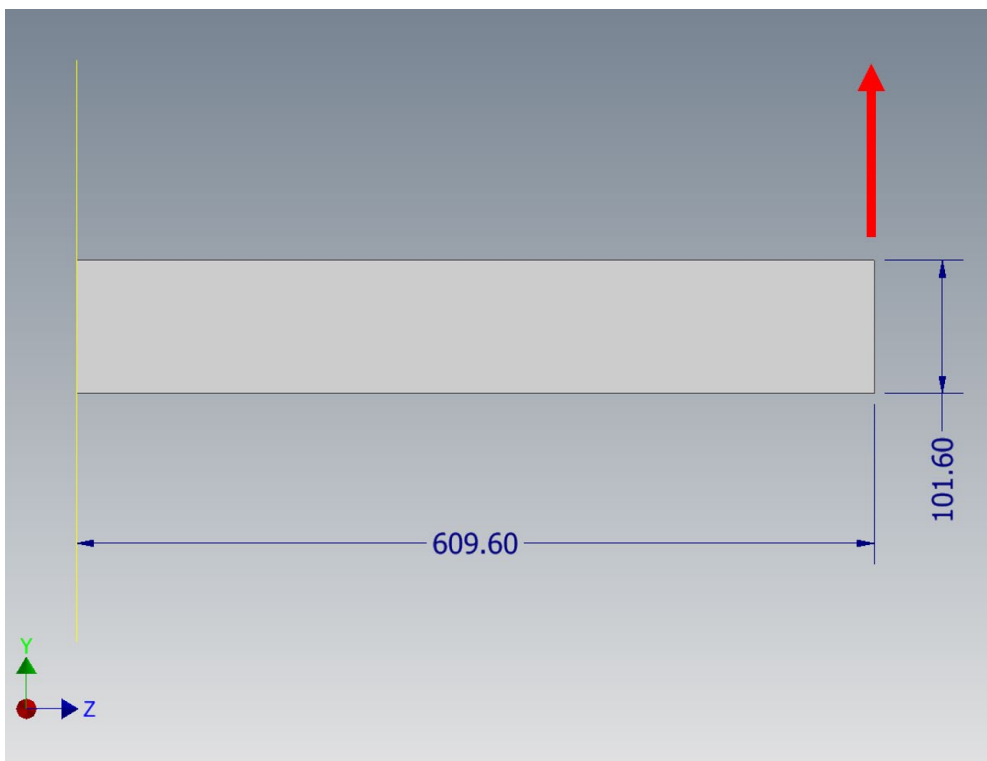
Beam bending force diagram for spreader bars, all dimensions are in millimetres.
